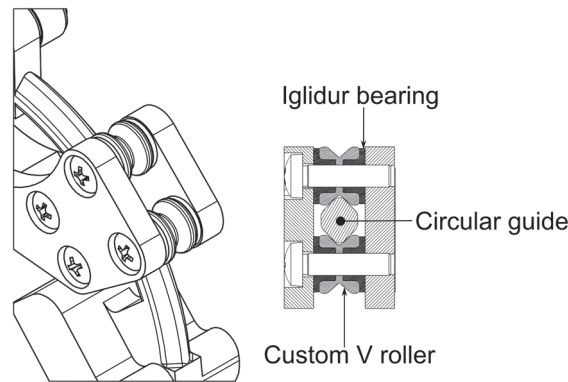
Detailed view and section of the designed circular guide, using bearings with V-shaped profile
